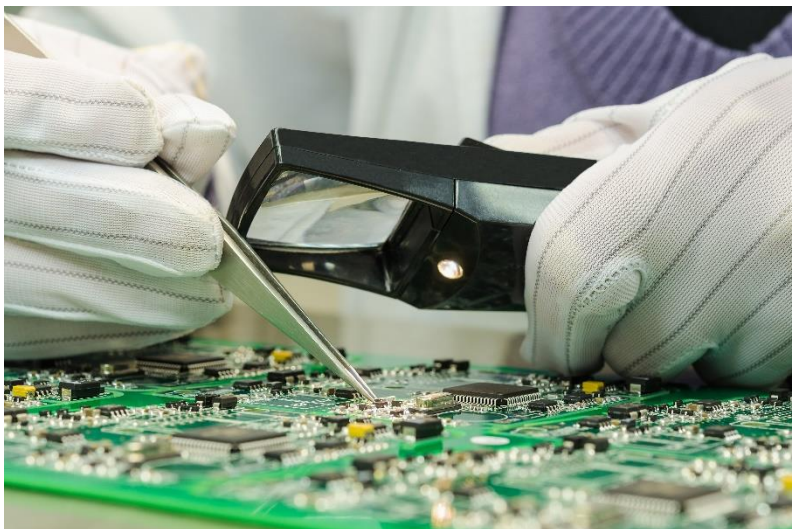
An EMS technician working with a printed circuit board (PCB)
